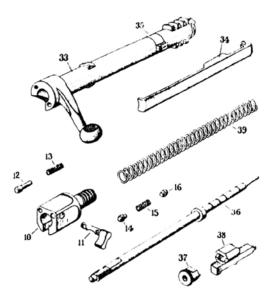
Exploded view of the components making up a bolt assembly for a bolt-action rifle. This is the type of drawing that gunsmiths will encounter the most.
